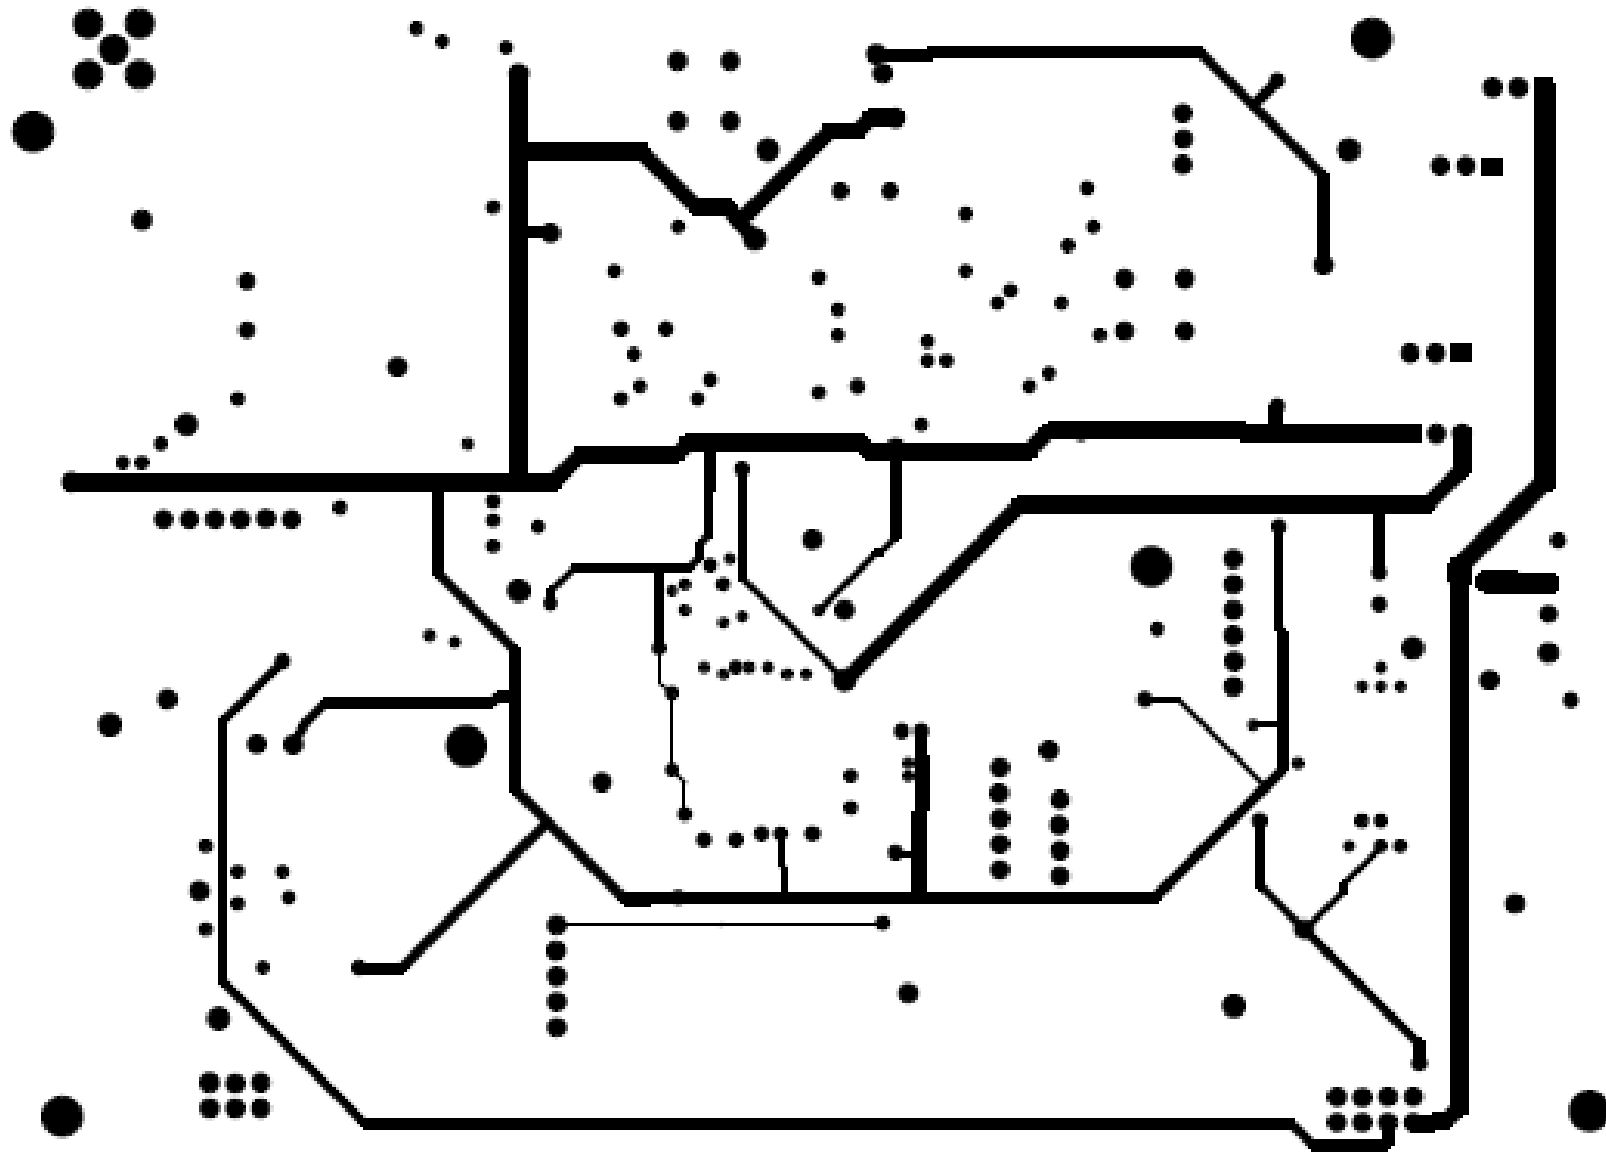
Receiver Digital Board Power Layer Copper Layout
